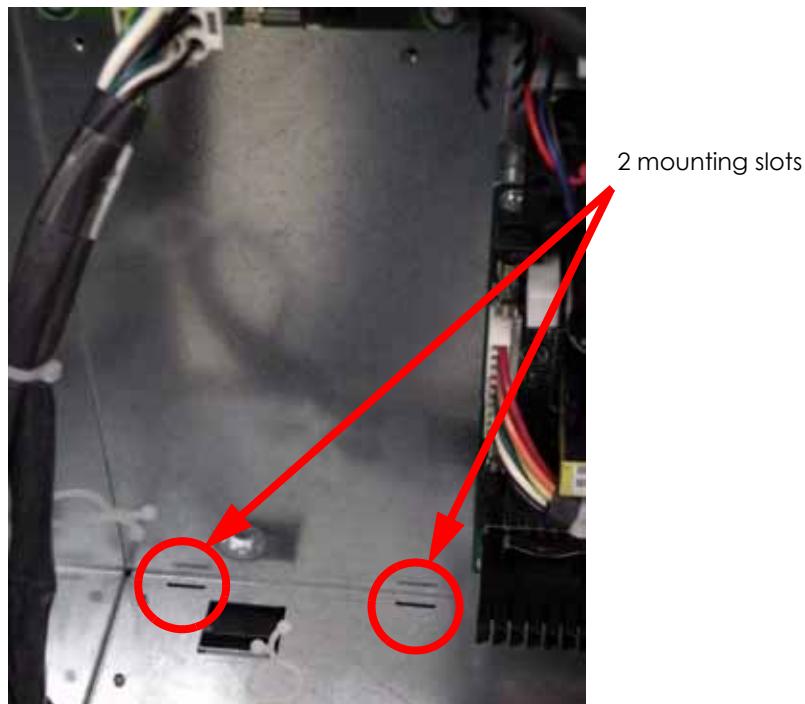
24 VDC power supply mounting bracket mounting screw locations
